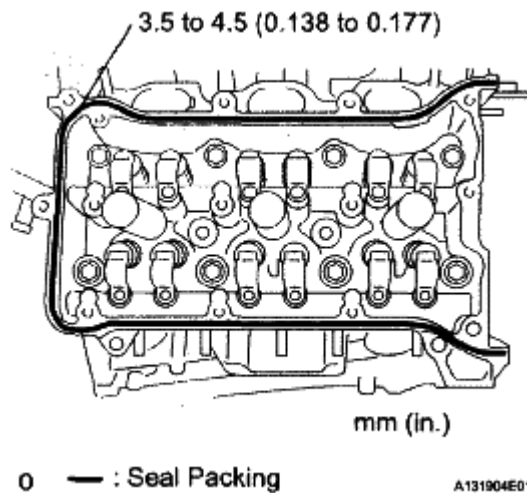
Identifying Camshaft Housing Sub-Assembly Seal Packing Diameter
